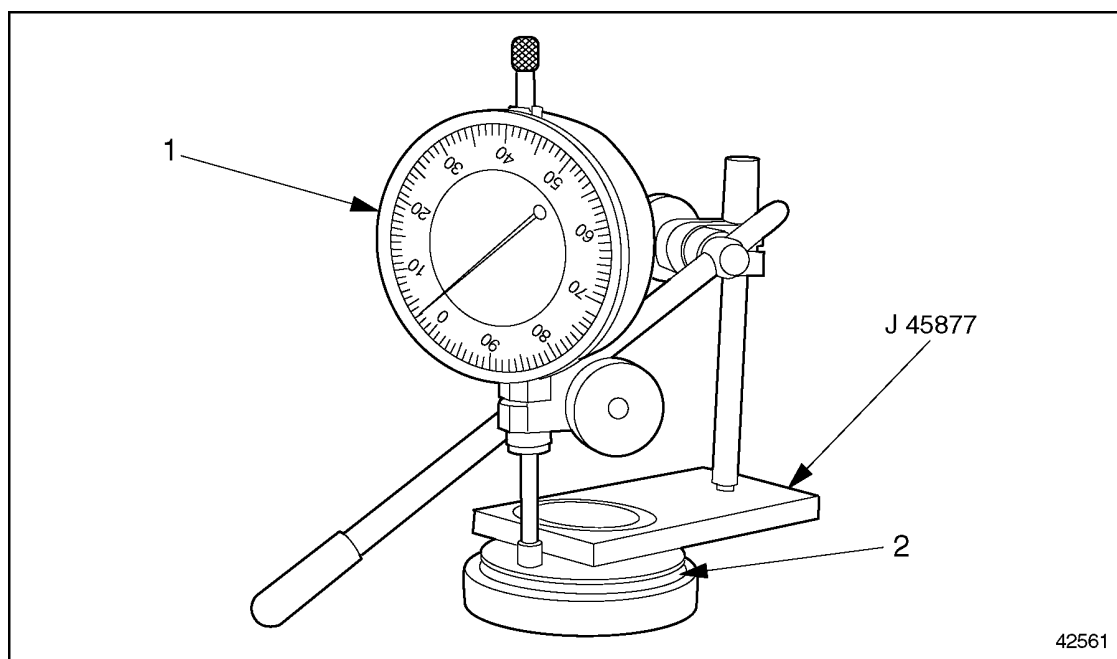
J 45877 Seal Run Out Gauge Adaptor
